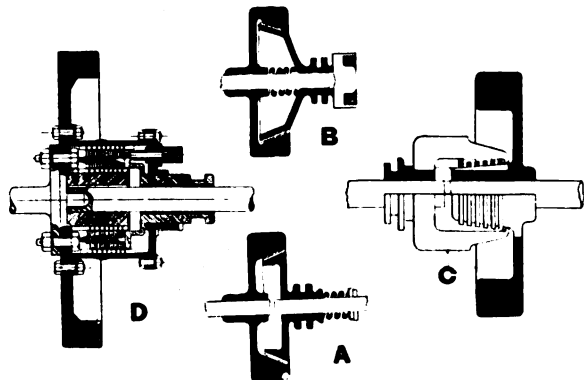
Some types of Main Clutches.—A, External Cone; B, Internal Cone; C, Coil or Scroll Clutch; D, Hele-Shaw Multiple Disc Clutch.
